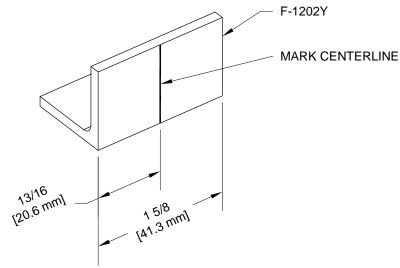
MAKING THE STRUT ATTACH ANGLE
